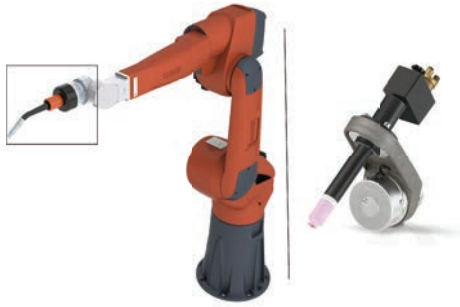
robot-based welding power source: welding robot (left) with a MAG welding torch (in the left box), TIG welding torch (right), source: Carl Cloos Schweisstechnik GmbH
